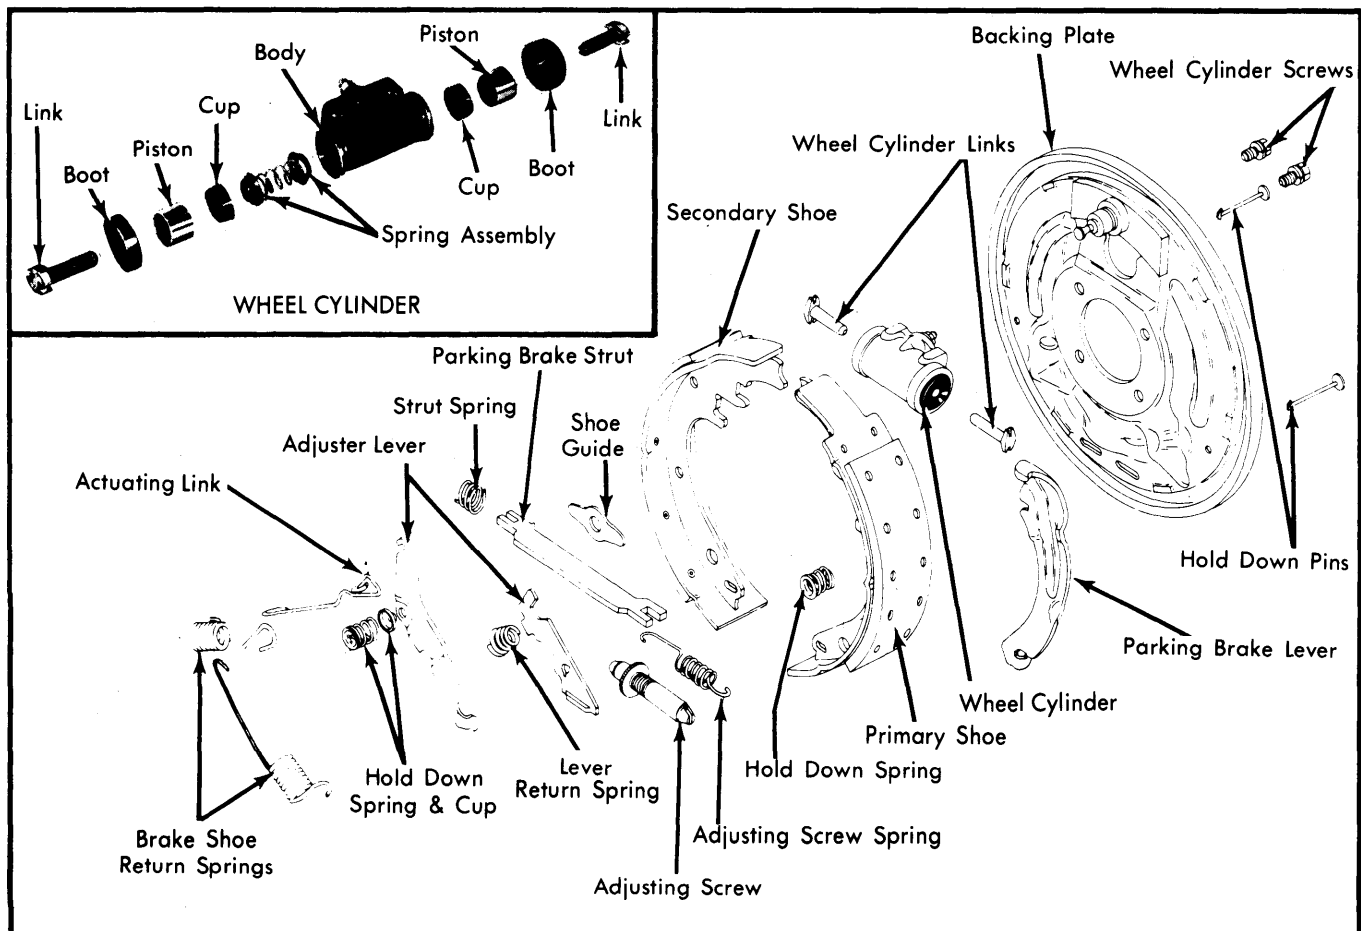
Exploded View of Rear Drum Brake Assembly & Wheel Assembly (All Other General Motors Models Shown)
